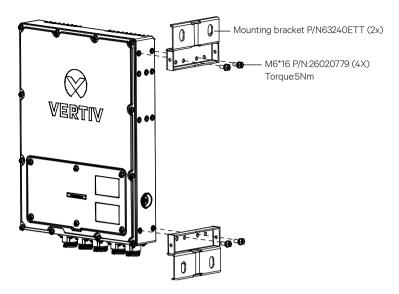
Installing the Mounting Brackets to the Rectifier (Flat)
